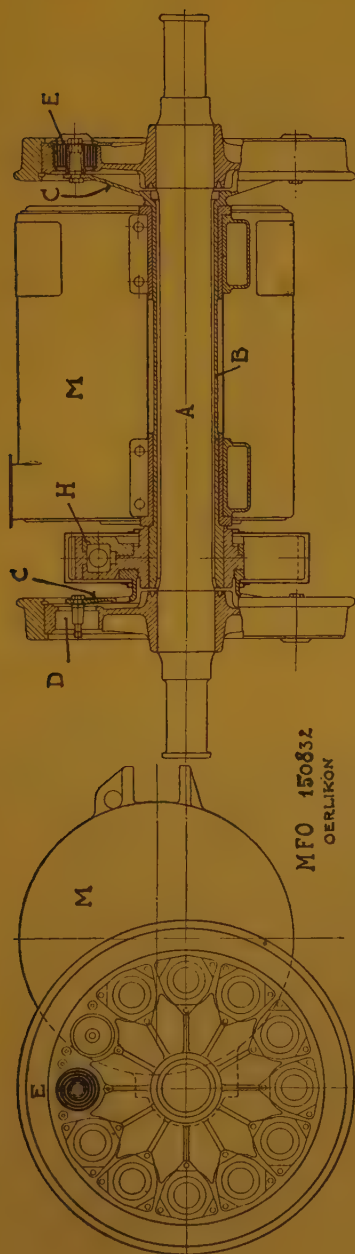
End view and cross section of axle fitted with Oerlikon helicoidal spring mechanism.
